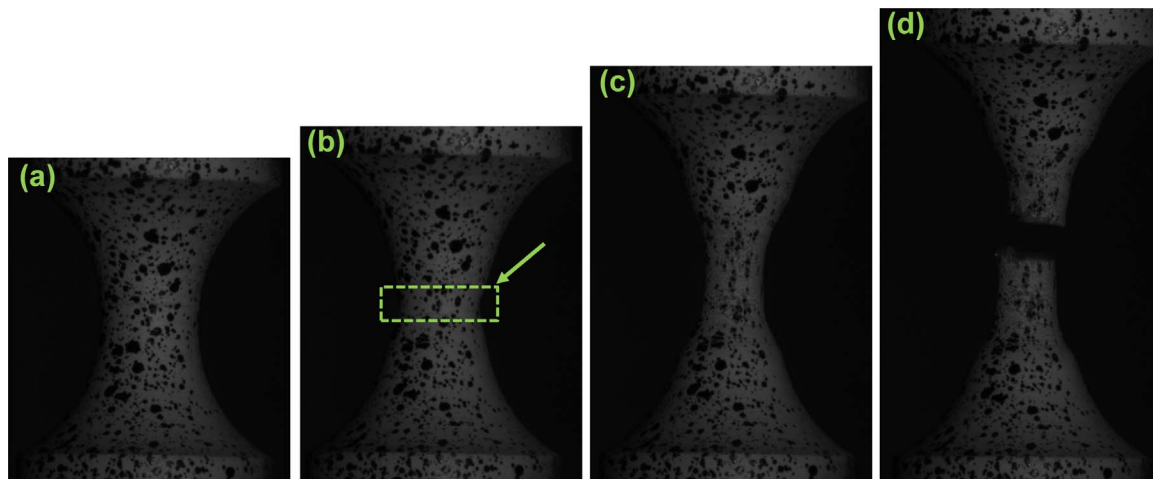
Stages of deformation in a notched specimen: (a) beginning of the testing, (b) onset of the necking, (c) propagation of the necking and (d) complete the fracture.
